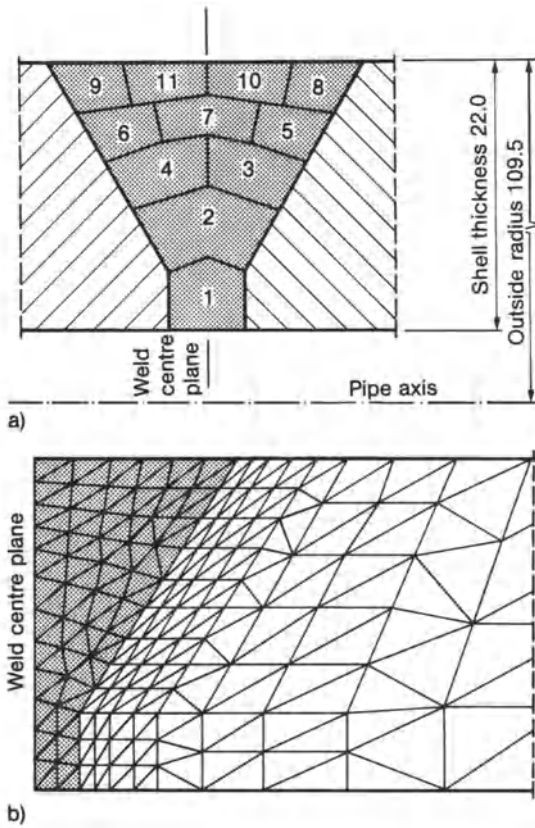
Multi-pass circumferential weld in pipe made of CMn-alloyed steel (a) and finite element cross-section model approximated as symmetric (b); after Josefson [379]
